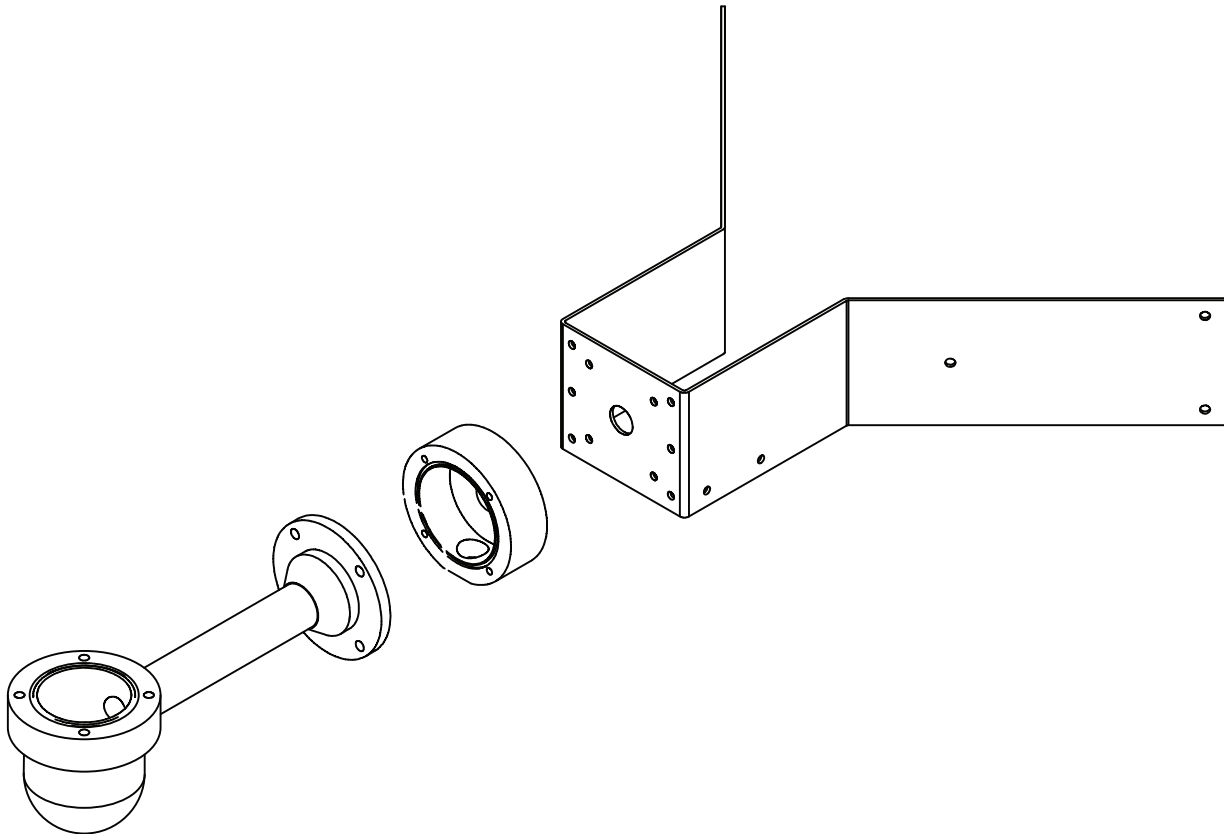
Typical corner mount (from left: Wall Mount Bracket (MIC-WMB), Shallow Conduit Adapter (MIC-SCA), and Corner Mount Bracket (MIC-CMB))
